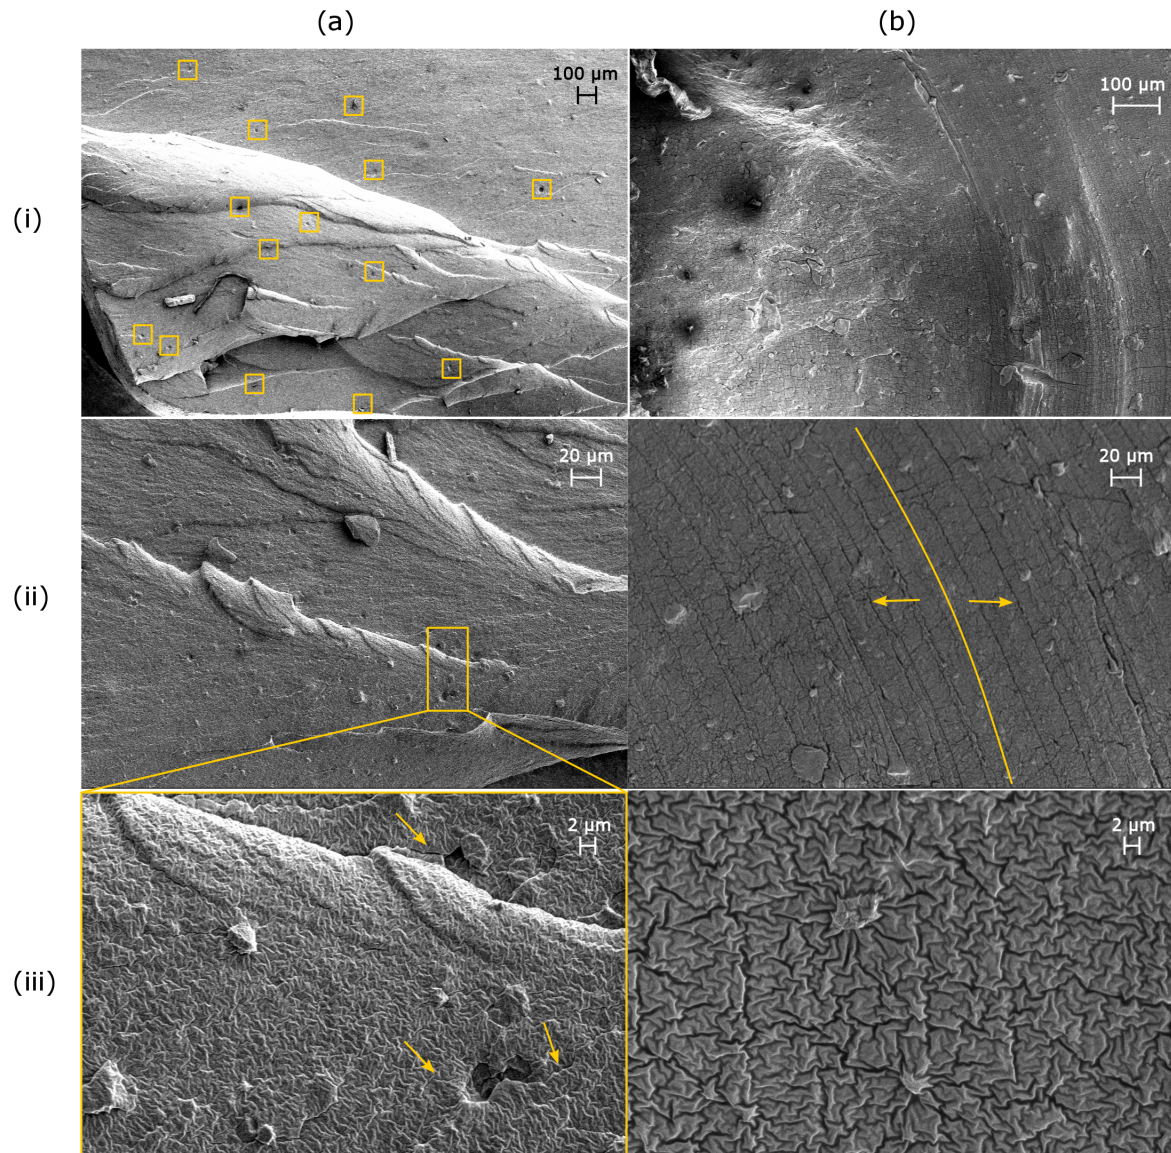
SEM of fracture surfaces of tensile specimens: (a) A, (b) 45A-55B. (a-i) Pores are visible on the fracture surface of the specimen A. The fracture surface is non-flat and irregular cracks are observed; (a-ii) and (a-iii) magnified view of fracture surface of specimen A. The failure cracks around pores are visible. (b-i) Non-porous flat fracture surface of specimen 45A-55B; (b-ii) The surface is covered with curved fracture lines parallel to the build direction. Shallower cracks are created perpendicular to the build direction. (b-iii) A magnified view of the fracture surface demonstrating the cracks propagation path.
